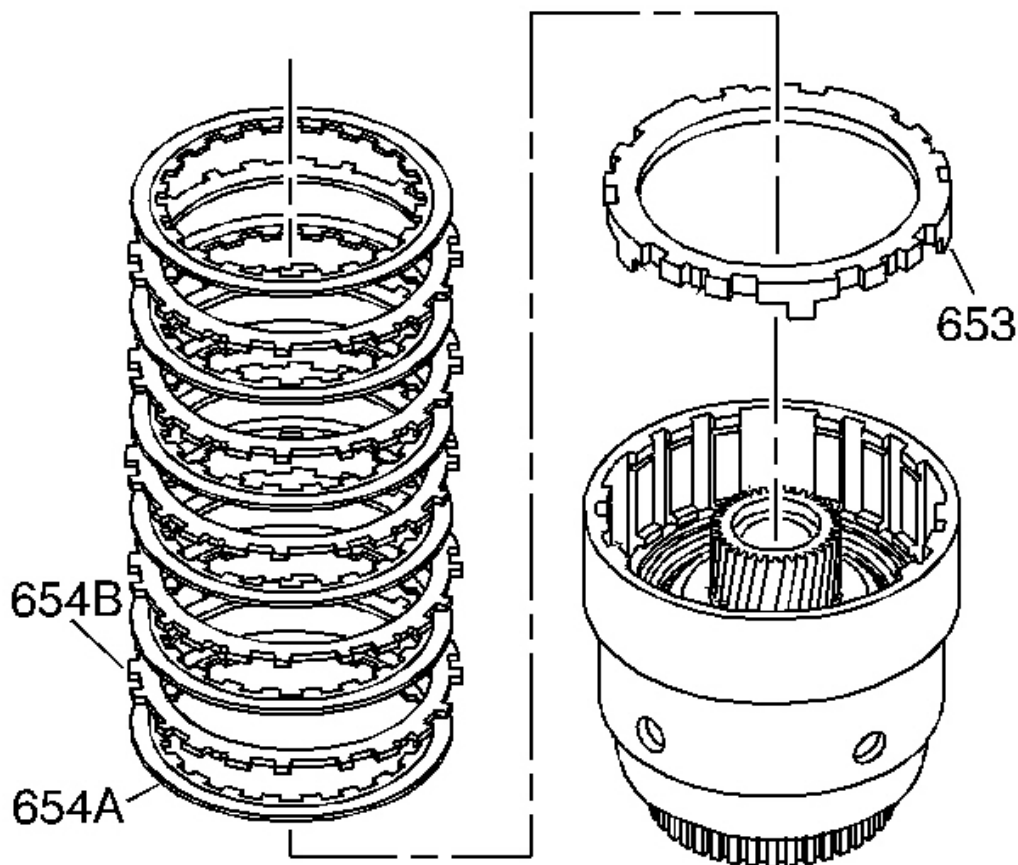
Installing Clutch Apply Plates Into Input Housing
